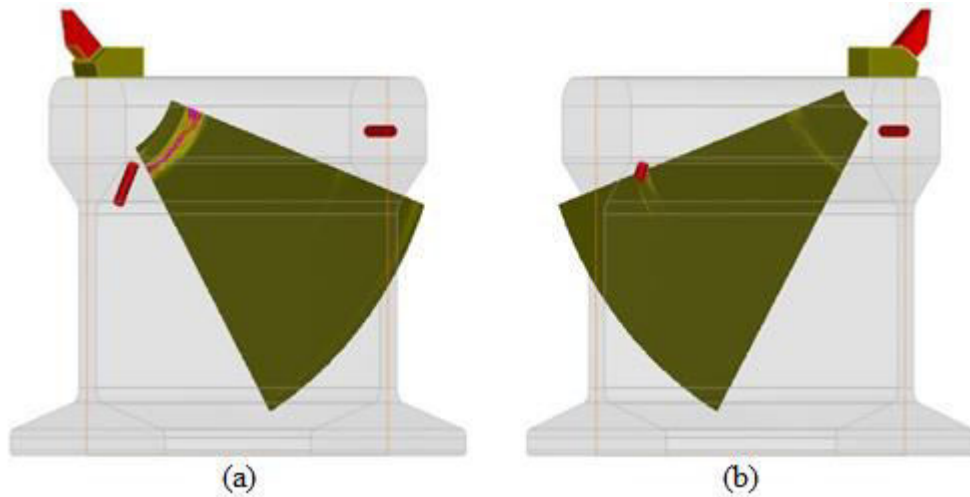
3D image view of the test sample while inspecting (a) defect-1 using PA2 (Wedge-2) (b) defect-2 using PA2 (Wedge-2)
